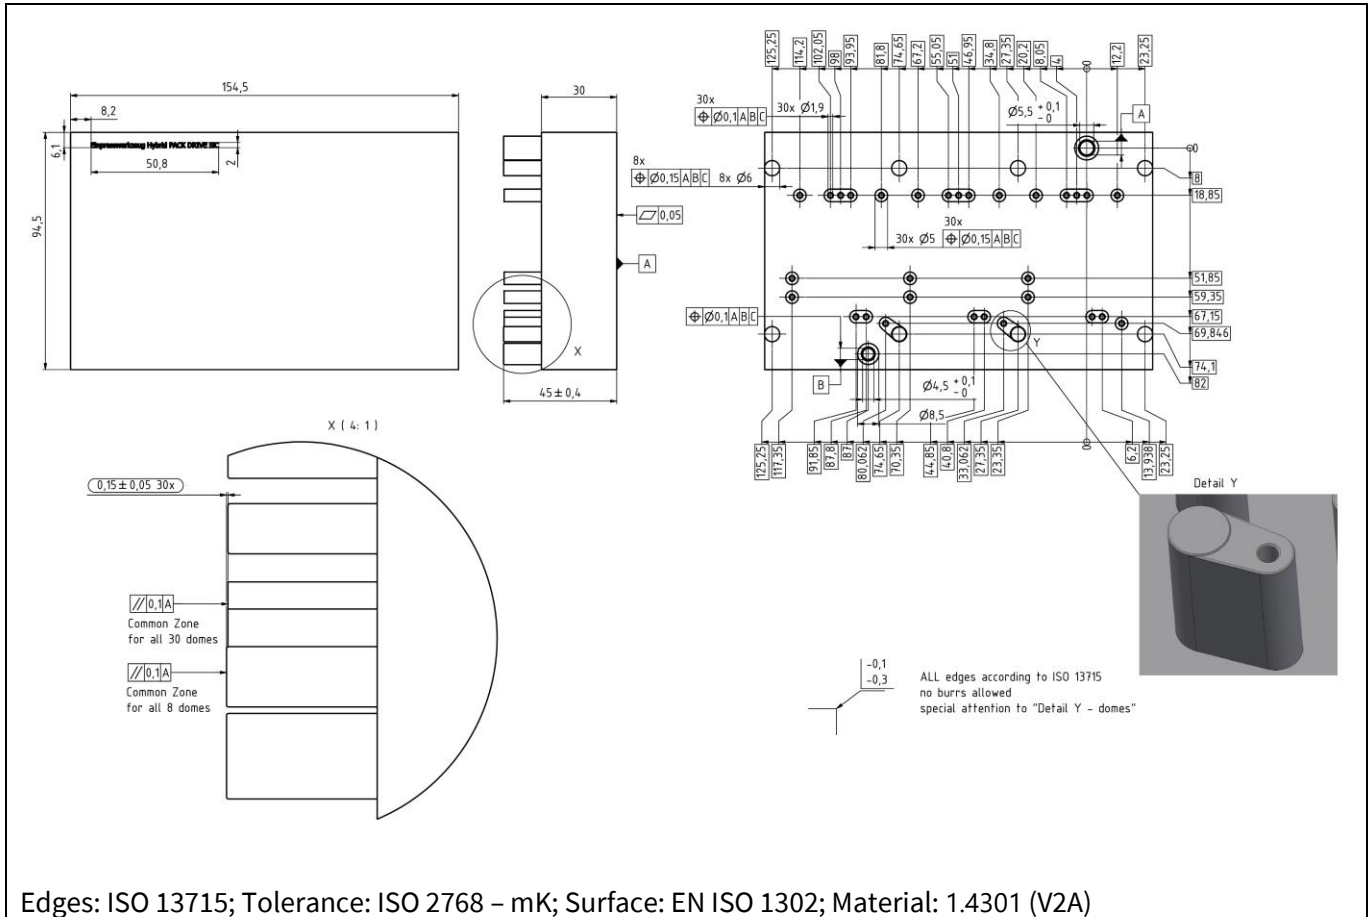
Technical drawing of the sample press-in tool with distance keeper (Top Tool). The shown tool is for HybridPACK Drive modules with SiC MOSFETs.
